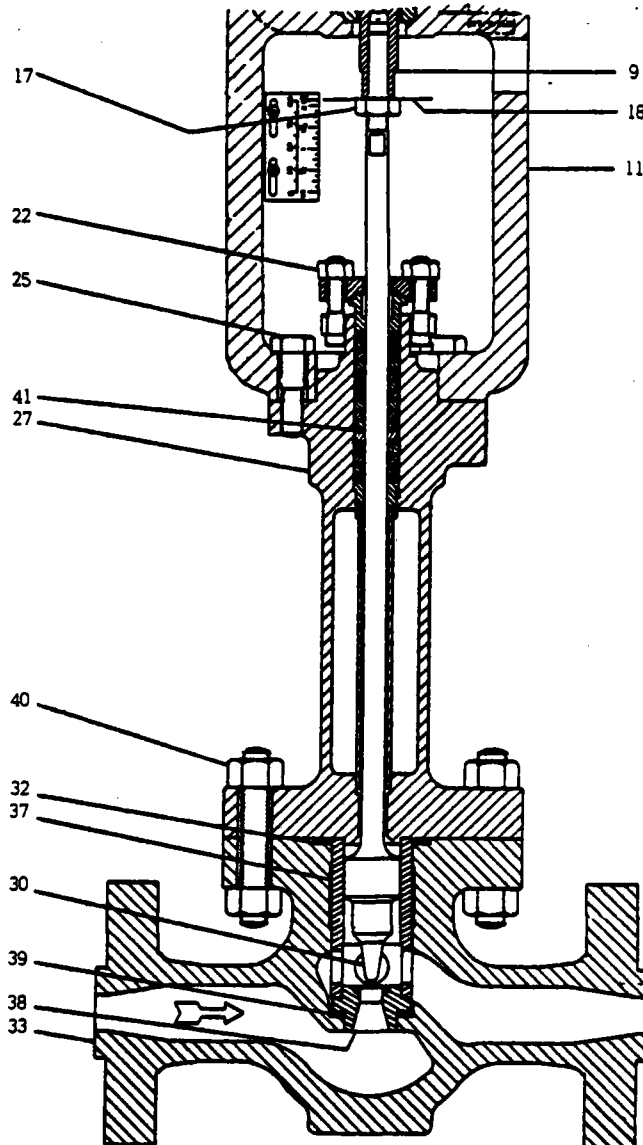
DOS, Cage Trim, Socket Weld End Type. May also be butt weld end, Flanged End or 90° Angle Type.
